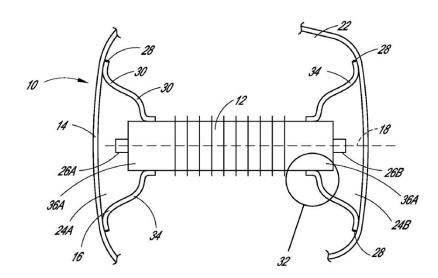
Patent of thermoelectric assembly using cardtridge support fixture.
